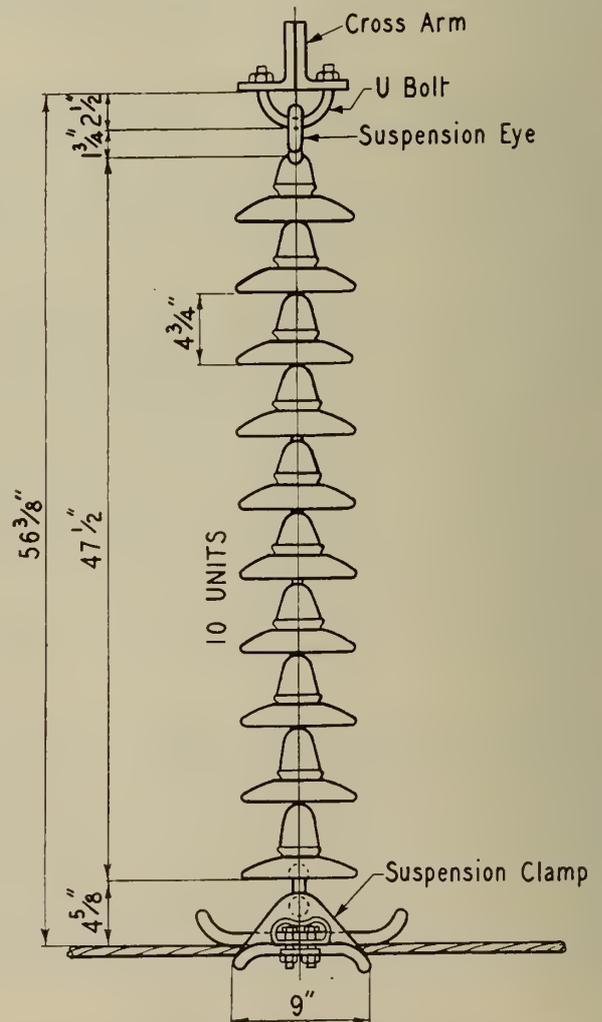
Suspension Insulator Assembly, Quebec-Isle Maligne 165-Kv. Line.
